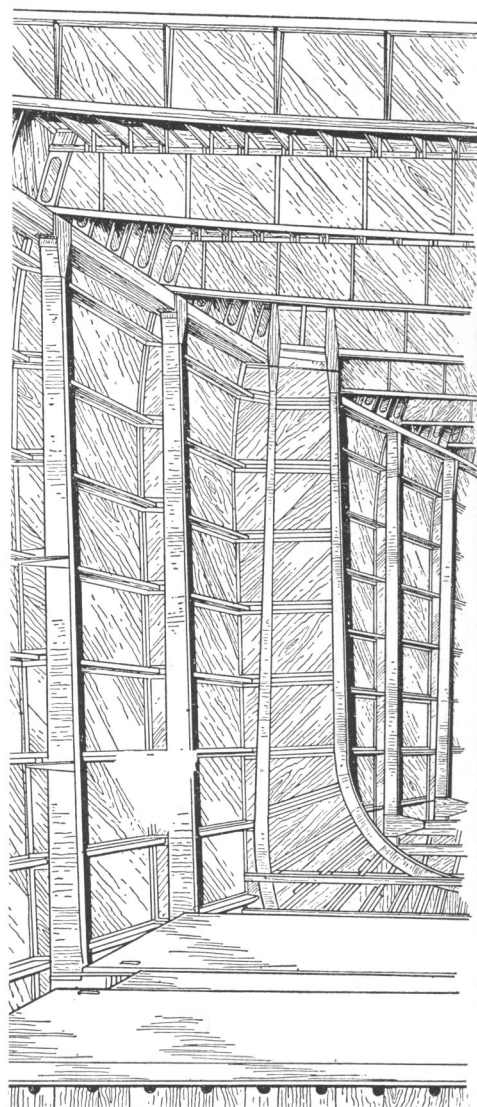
Detail sketch showing the construction inside the fuselage below the flight deck of a Hughes H-4. The flooring in the foreground covers 14 fuel tanks of 1,000-gal capacity each.
